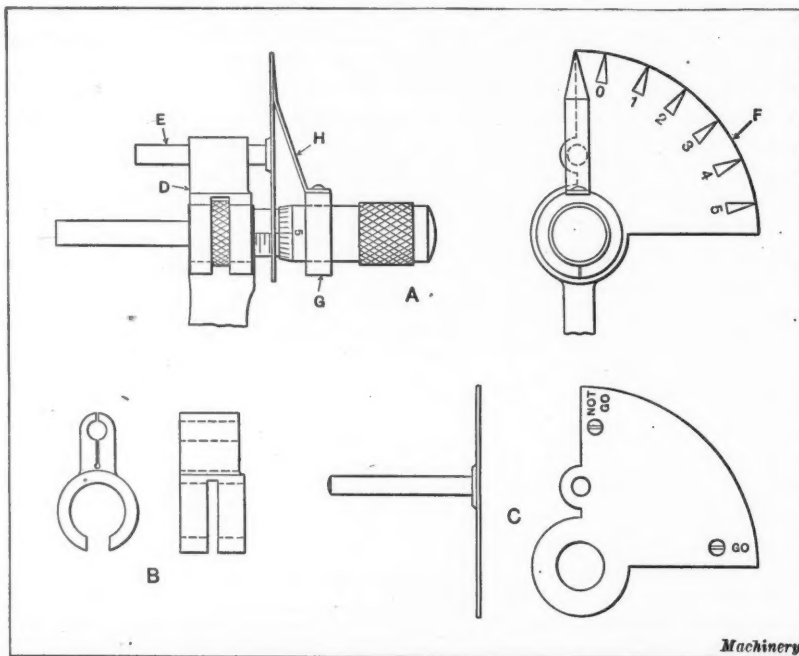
Attachment which permits the Reading of Thousandths of an Inch on a Dial at Right Angles to the Spindle
